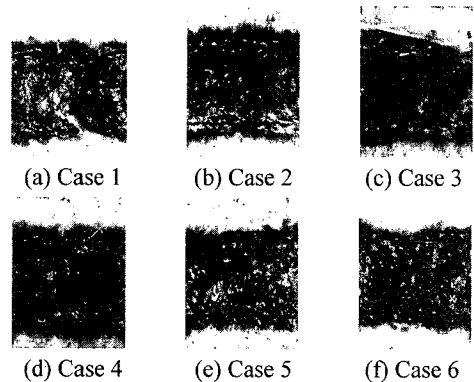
Optical microscopic photos of EDM milled slots on brass workpieces
